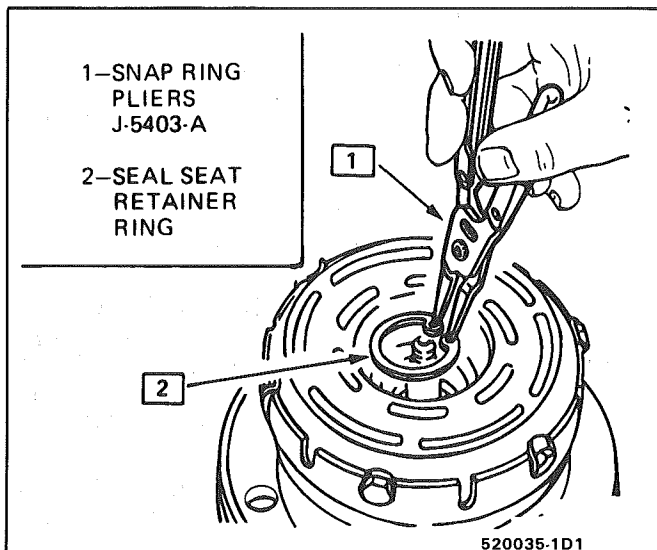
Removing and Installing Shaft Seal Seat Retaining Ring
